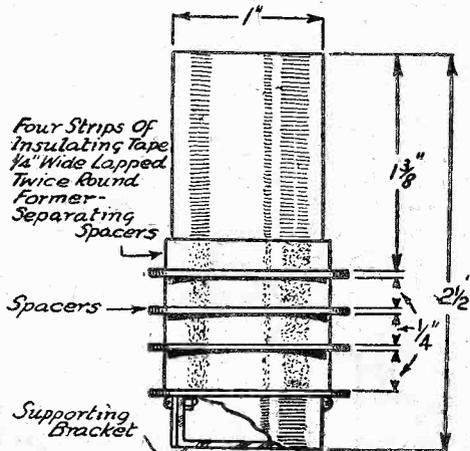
Dimensioned sketch of the paxolin former, showing how the washers are spaced by means of insulating tape.
